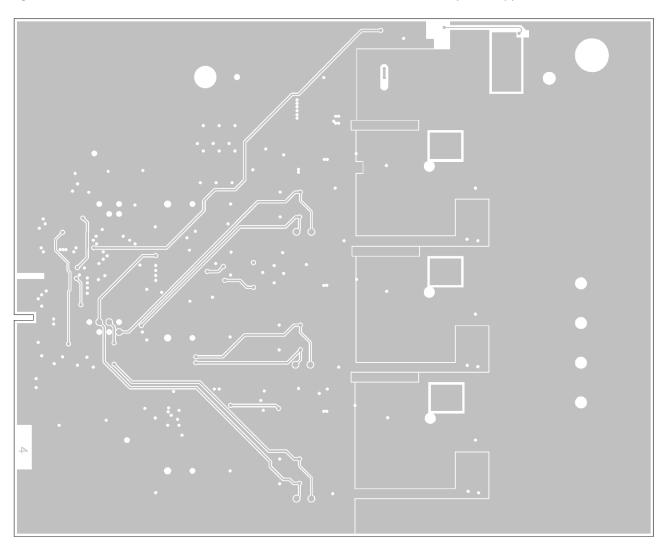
EPC7C021/EPC7011L7 3-Phase Motor Driver Eval. Board Inner Layer 3 Copper Etch (1 oz).
